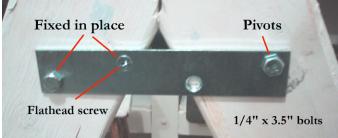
Detail of "A" brace hinge. There is a matching six inch plate on the back side as well.
